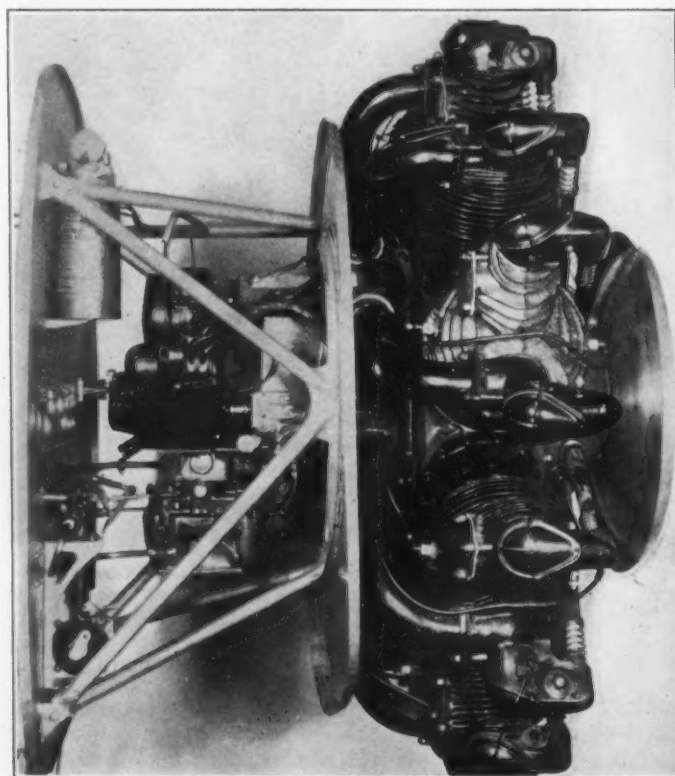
MOUNTING OF WASP ENGINE IN VOGHT AIRPLANE
